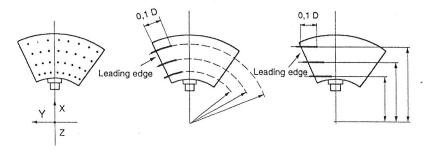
Runner/Impeller of axial flow machine. Example of locations for blade profile measuring sections or measuring points
